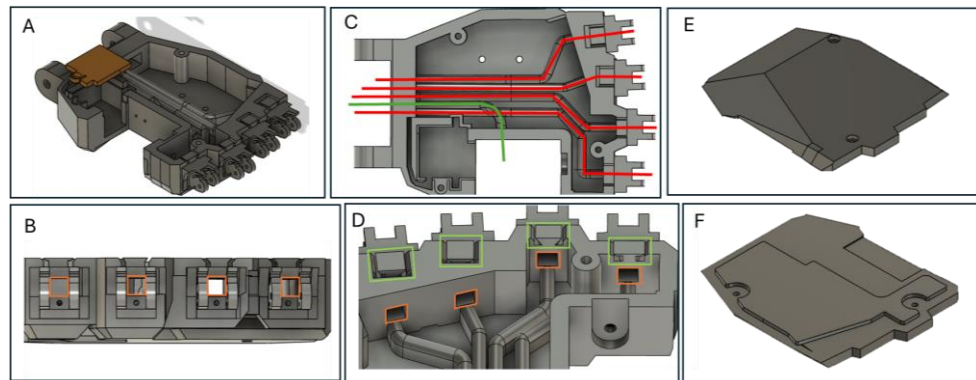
CAD model of the hand (A) three plane view (B) top view (C) front view (D) back view (E) hand cover top view (F) hand cover down view.
